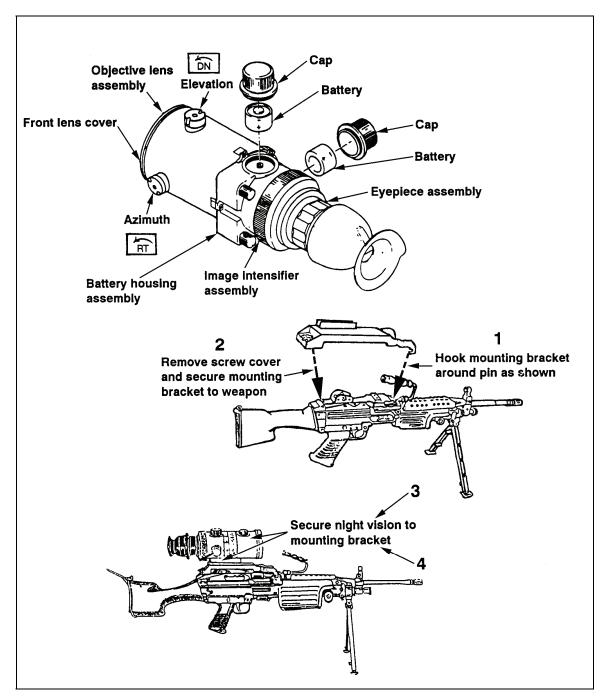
Mounting of the AN/PVS-4 onto the M249 light machine gun.
